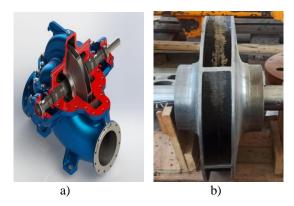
CNP 630-90 pump: a) general view of the pump; b) two-way entry impeller
